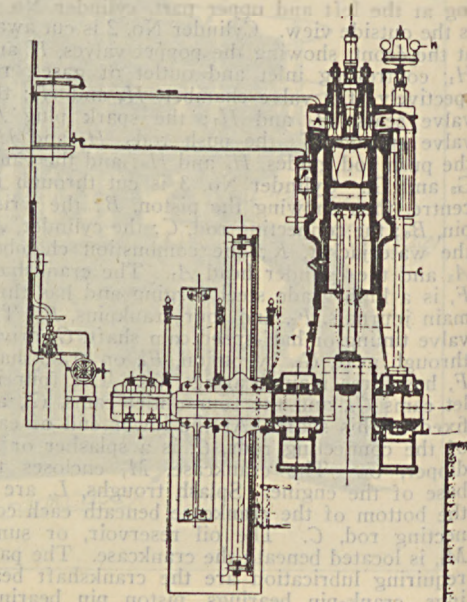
Longitudinal Section of M. A. N. Diesel Engine.
